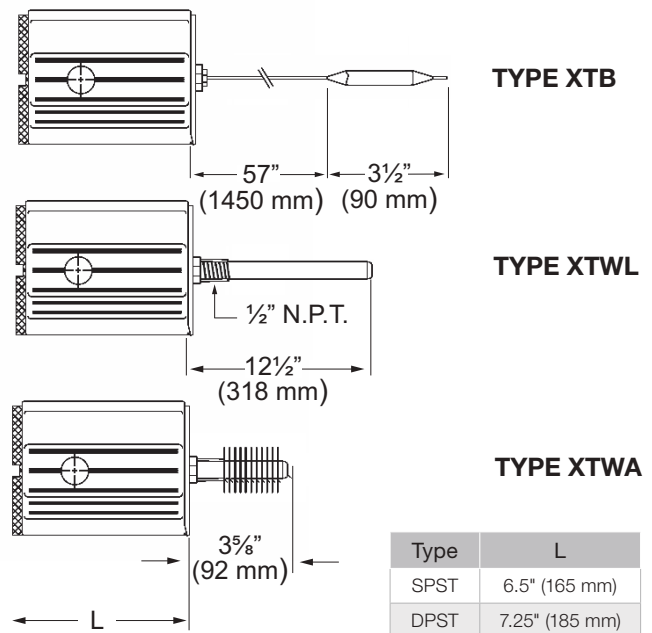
Norseman™ Explosion-Proof Thermostat Dimensions
